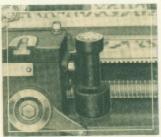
Dial Thread Indicator Shows proper position for engaging half nuts to catch thread at beginning of each successive cut.
